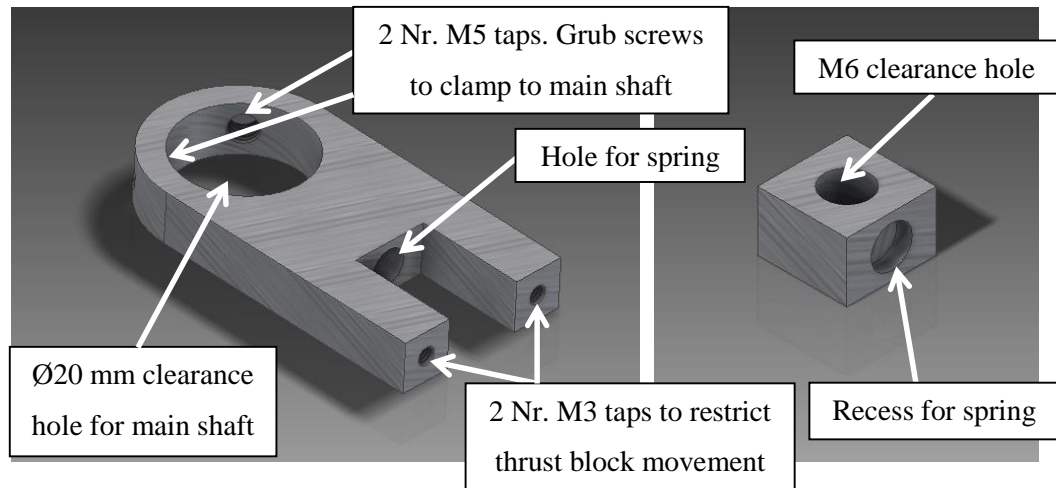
Aluminium fork design (a) & aluminium thrust block (b)
